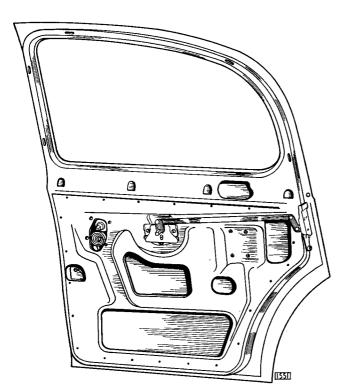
View of rear door showing the window winding and door lock mechanisms.
